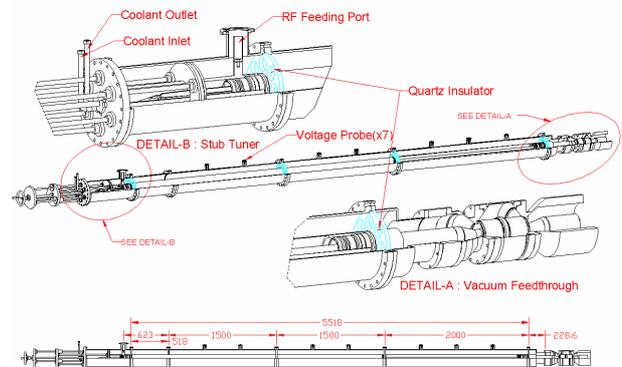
Cut-away view of bottom line. Cooling channels are shown inside the inner conductors of VF and transmission line.
